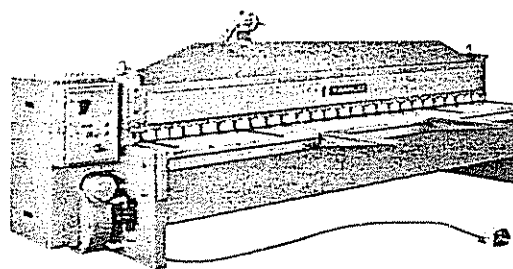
Press brake for sheet metal cutting and forming (courtesy Famco).
